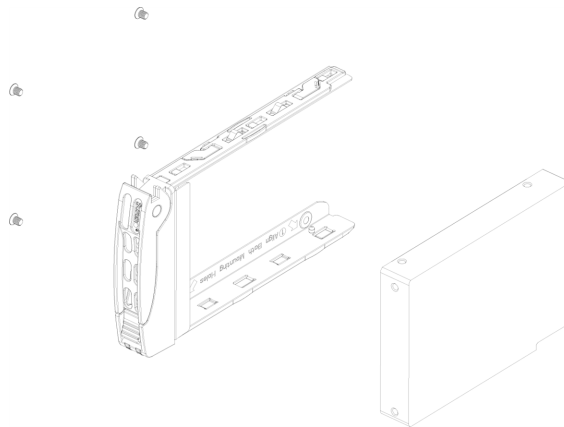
Placing a 2.5" Storage Drive into the Drive Carrier
